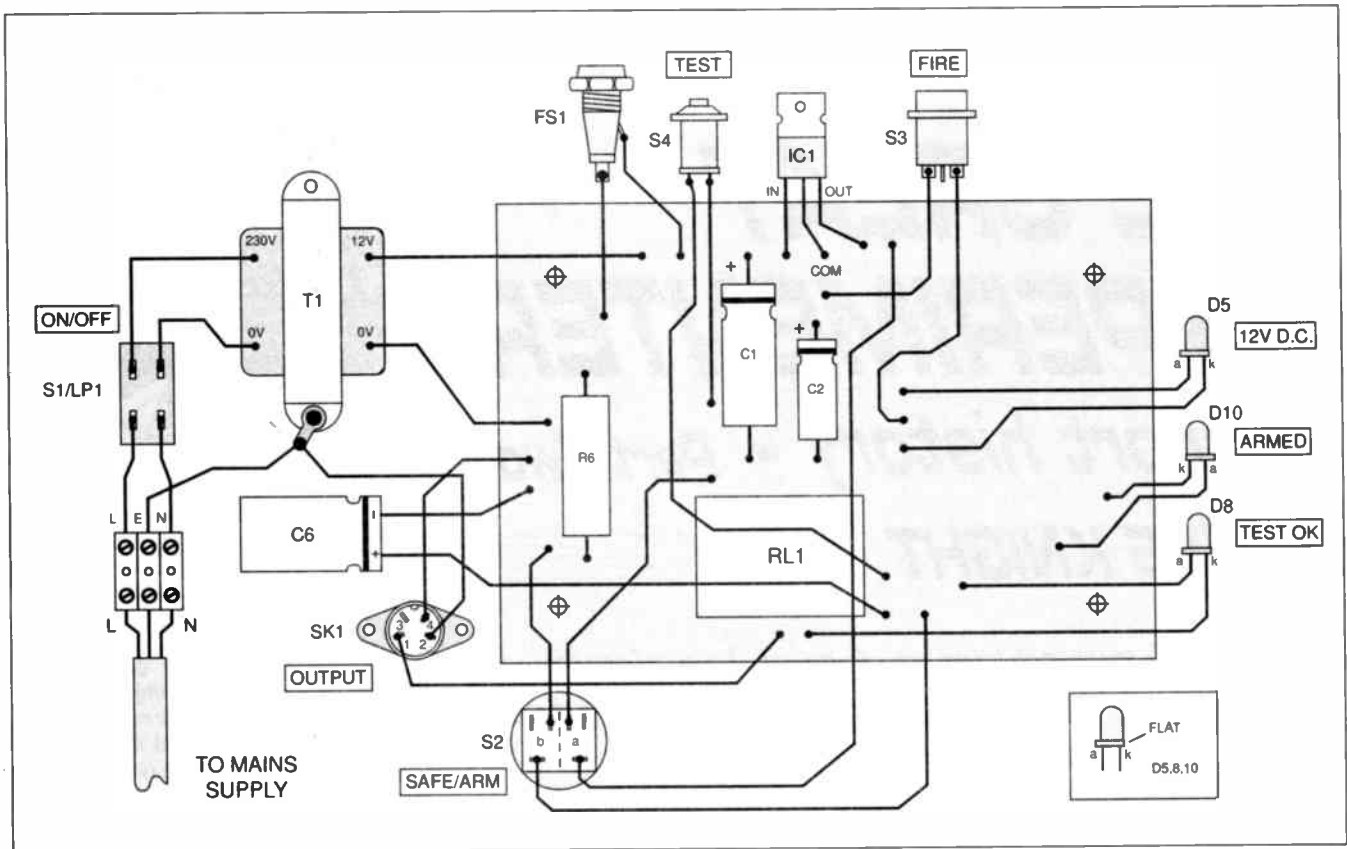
Interwiring to all the off-board components. The general layout inside the case can be seen in the photographs.
